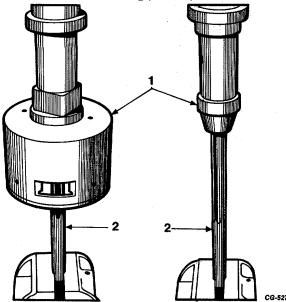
Burnishing Upper and Lower Bushings Using Burnisher 1955-2
